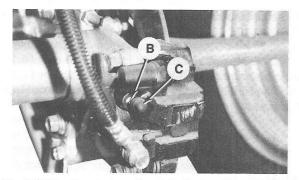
Rear brake caliper bleed valve (B) is accessible after removing protective cap (C).
